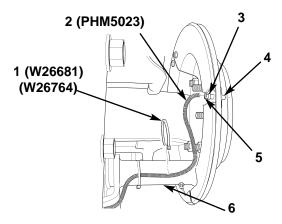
Installing Split Loom on Wheel Sensor Power Cable.
